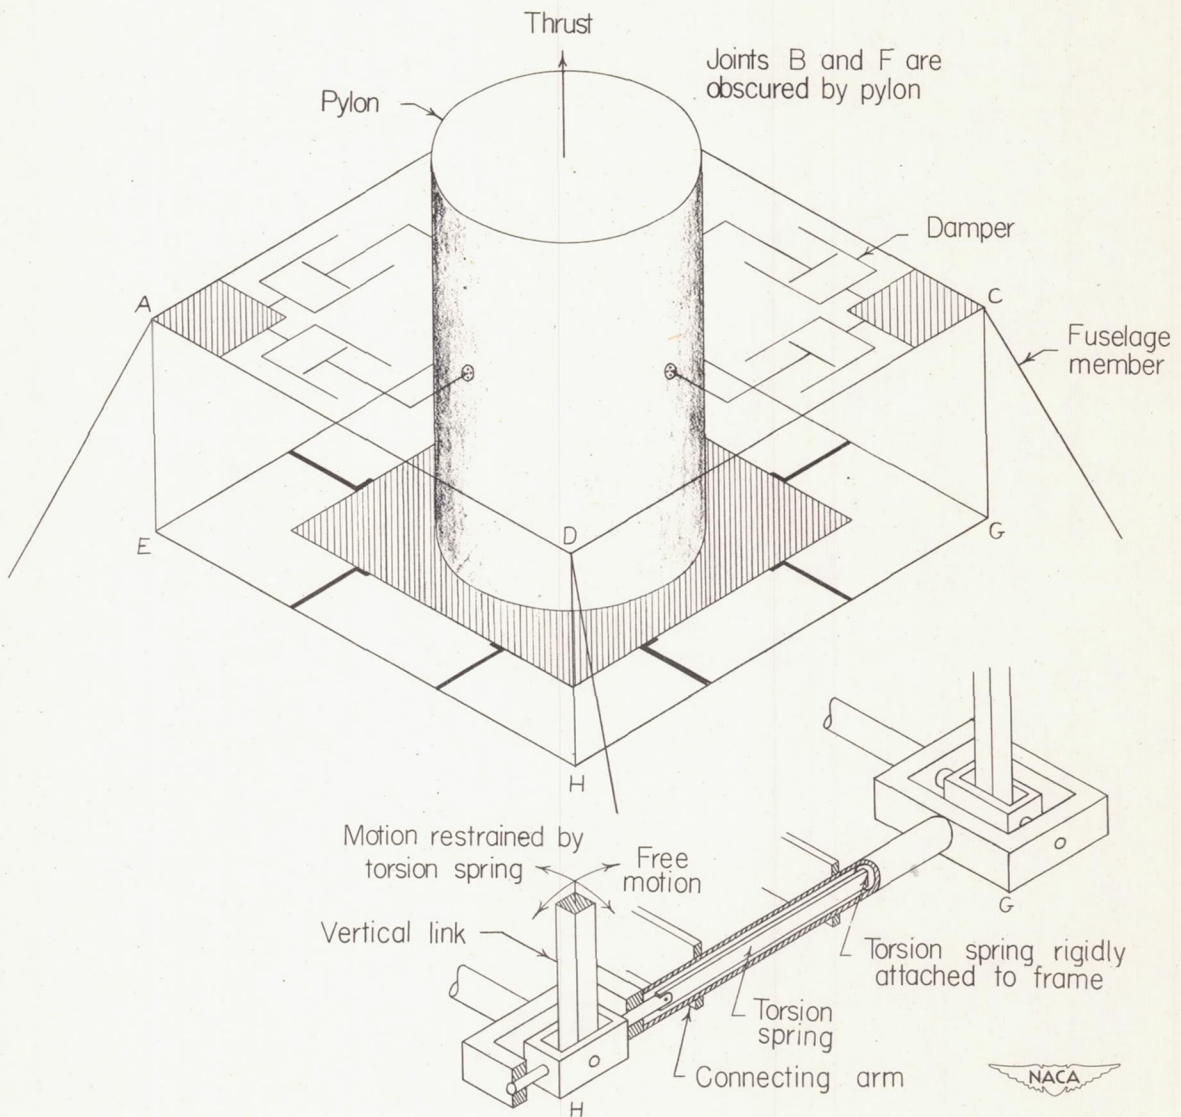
Schematic diagram of rotor-suspension system and detail of one torsion-spring assembly.
